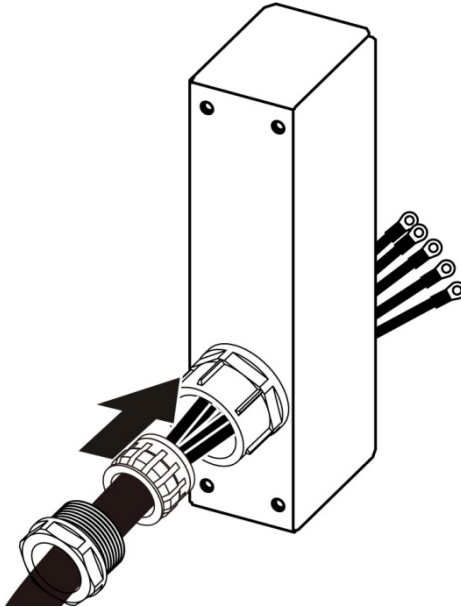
Assembling 62050P Input Terminal Safety Cover - 1
